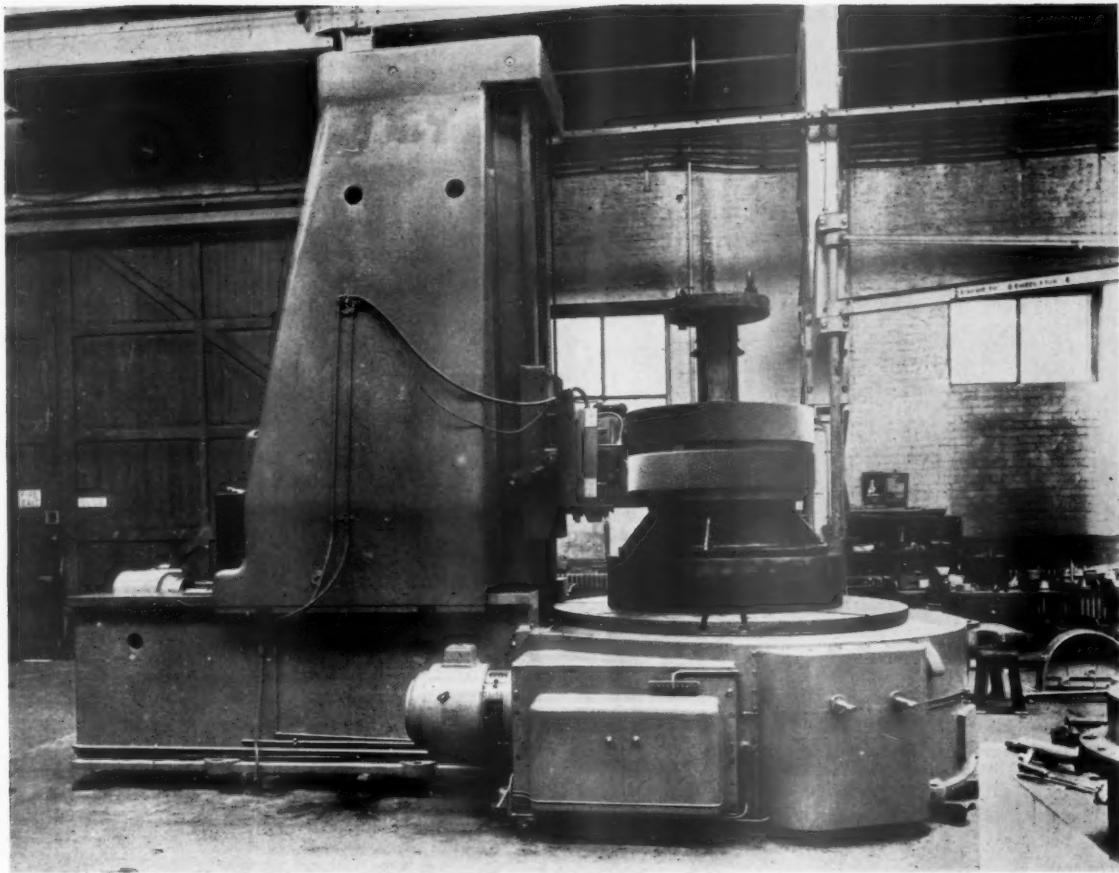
Shaving marine turbine gear on 100-inch shaving machine.
